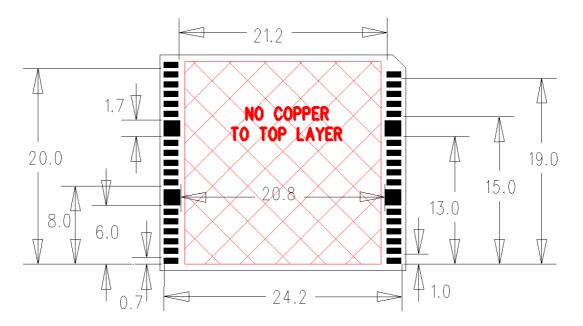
Suggested pad layout, top view through the package. Dimensions are in mm.
